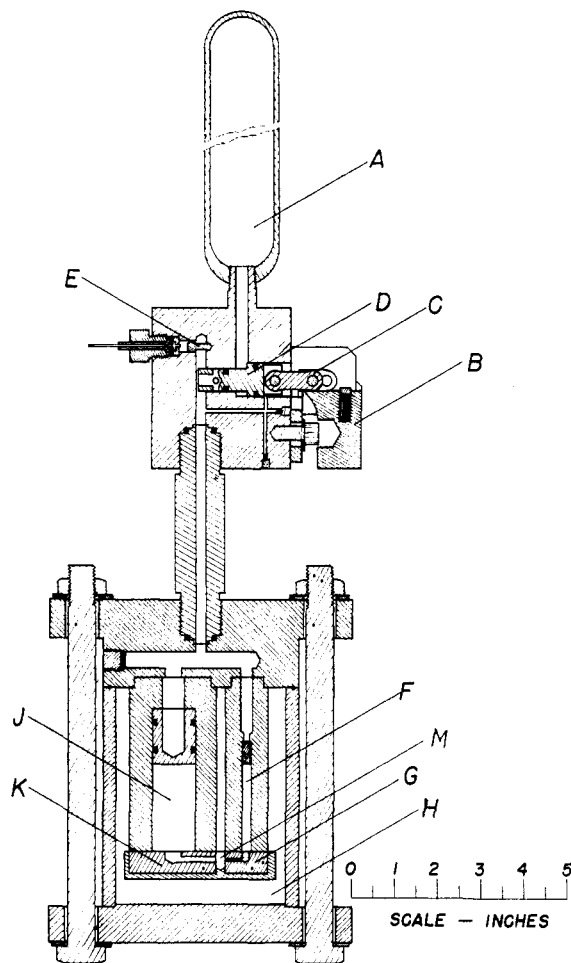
Cross sectional assembly drawing of pneumatic injector and bomb reactor: A, storage reservoir for driving gas; B, cocking block; C, valve toggle; D, rapid-acting valve; E, pressure-actuated contacts; F, small reactant cylinder; G, small injection plate; H, reaction bomb; J, large reactant cylinder; K, large injection plate; M, mixing zone.
